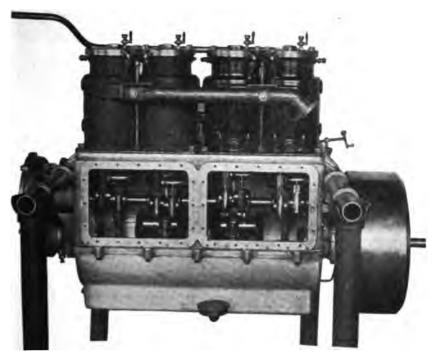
Silent Knight, intake side of motor, ba se hand plates removed, showing eccentric shaft. of lubrication, and is highly effective, uses little oil, and as the motor is entirely enclosed the oil keeps clean.
